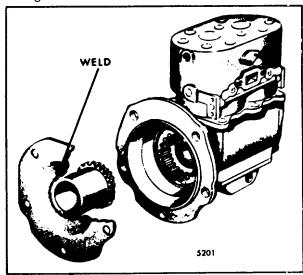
Fixture For Holding Drive While Installing or Removing Slotted Nut
